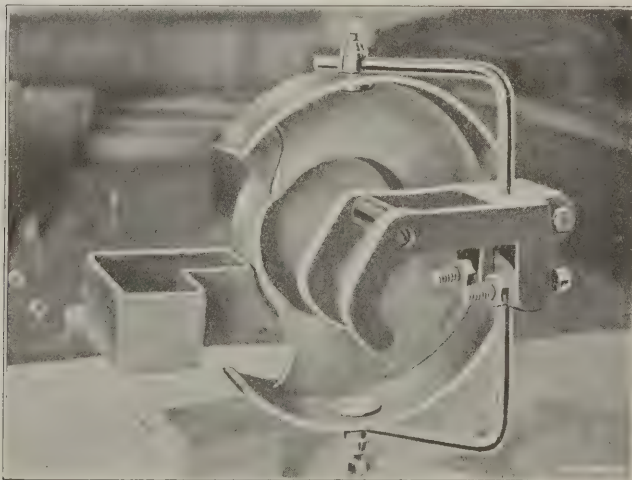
Emery Wheel Guard made by Universal Stamping Co.
